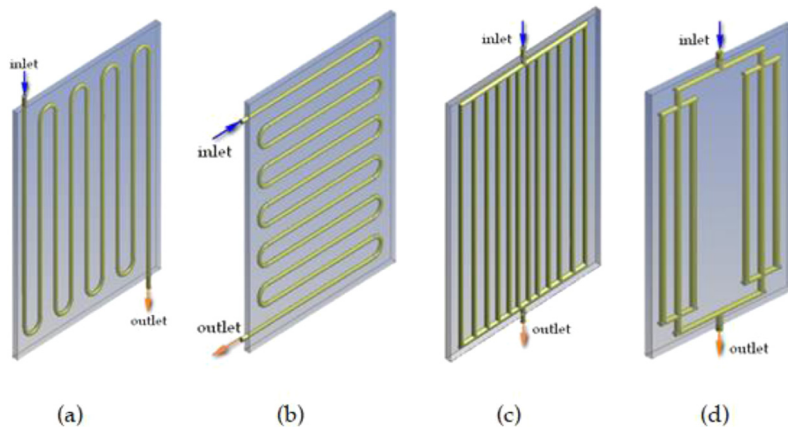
Different cooling plate designs: (a) design 1; (b) design 2; (c) design 3; (d) design 4.
